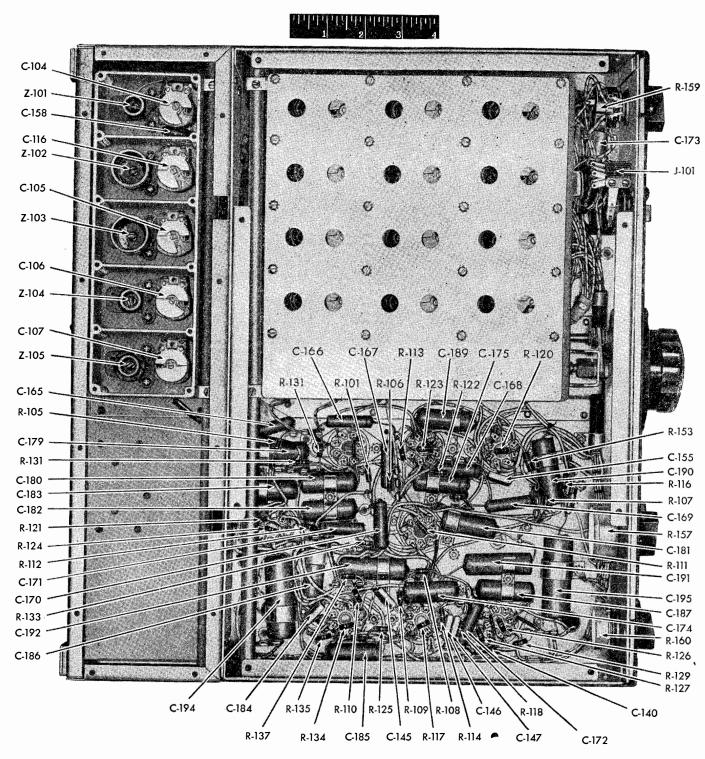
Bottom View of RAO-3 Radio Receiver Showing 1st I-F and A-F Sections
